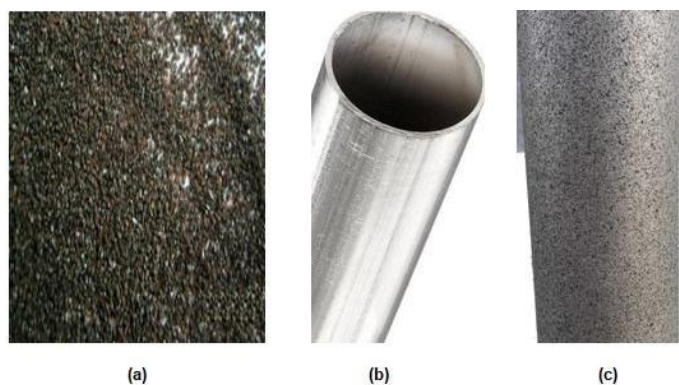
Surface preparation of SS316L pipe - (a) fused alumina fine particles, (b) original pipe surface and (c) pipe surface after blasting.
